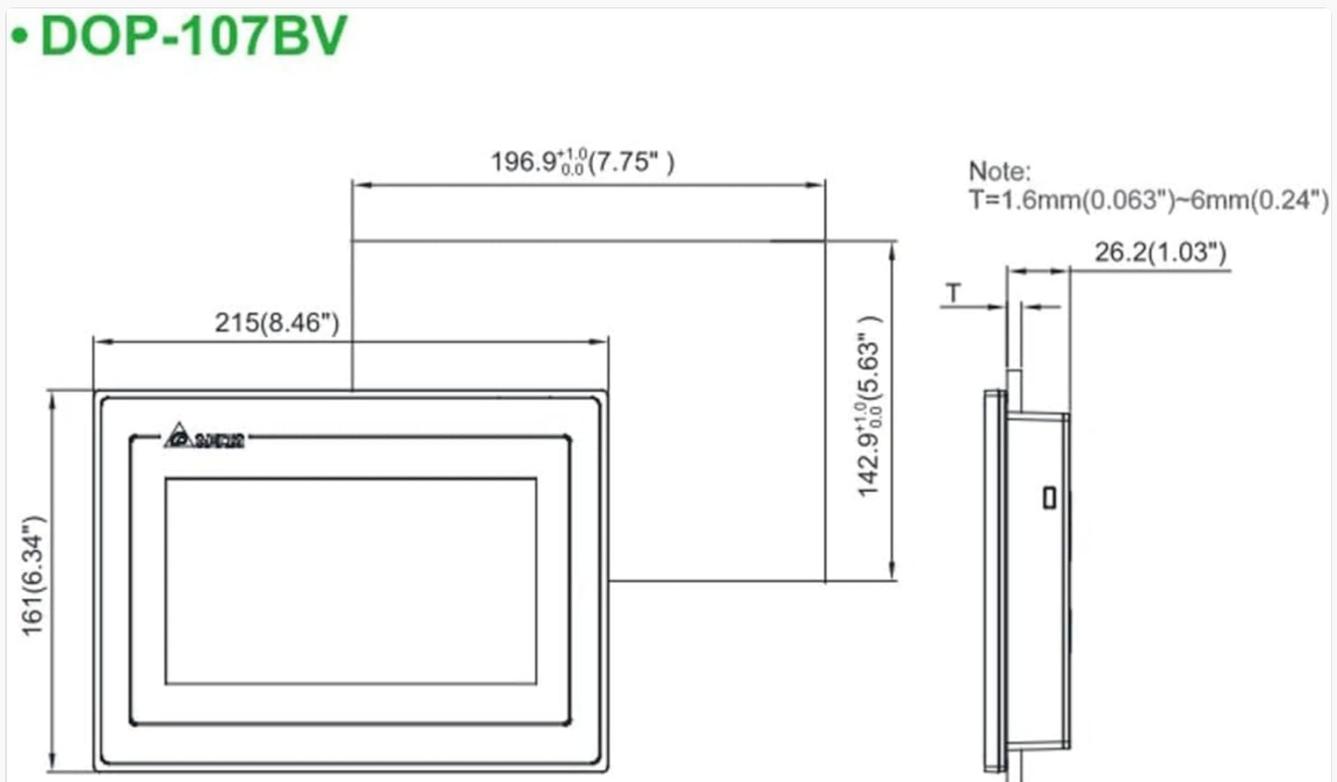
Dimensional drawing of the DOP-107BV HMI, showing height, width, and depth measurements.
